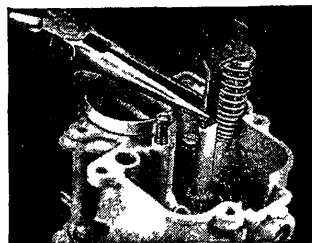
Install pump plunger and rod, pump spring and pump operating link
